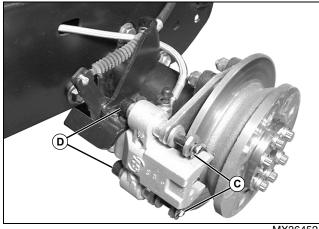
Picture Note: SN 40001- machines rear calipers shown, SN -40000 similar.
